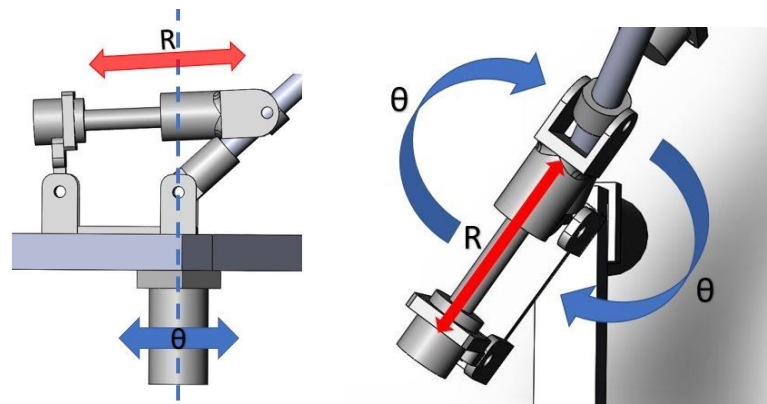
SCOUT hip joint design side view (left) isometric view (right)
